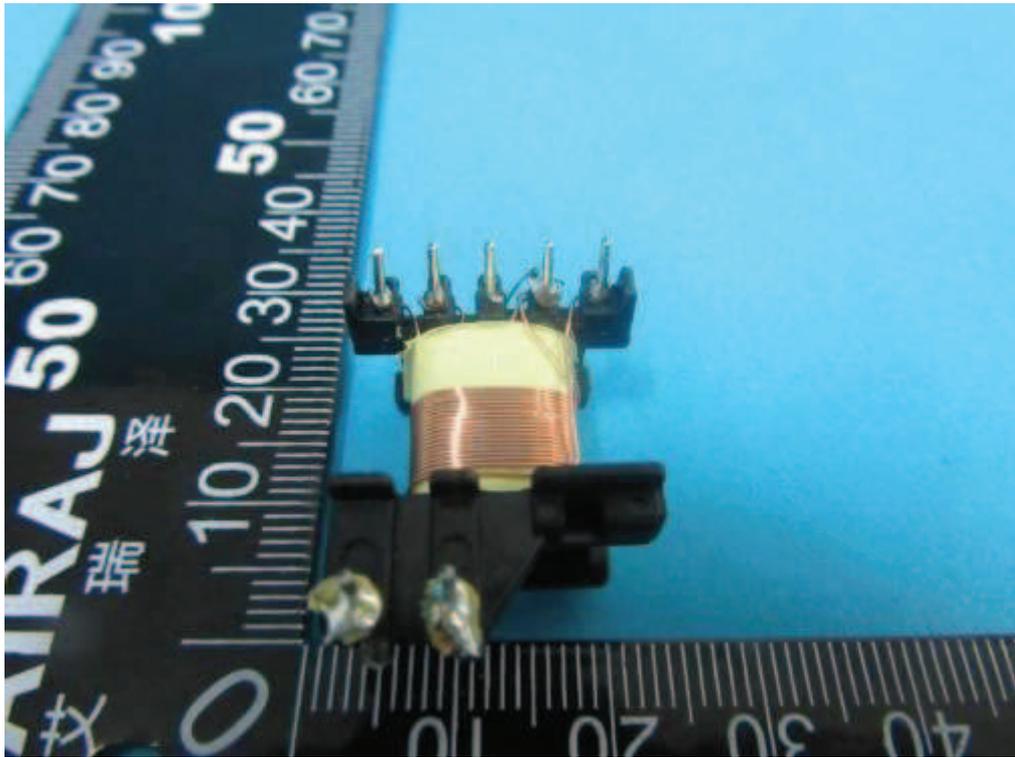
Detail view of transformer (for 90E12PU05-xxxx)
